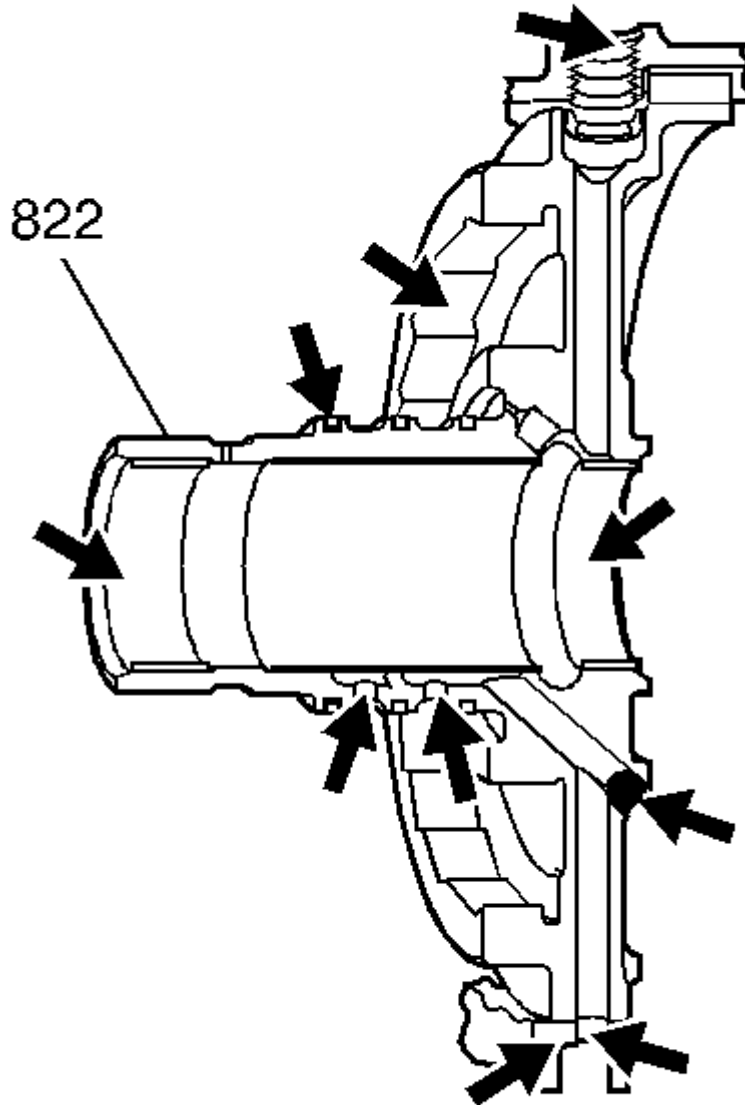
Inspection Areas On Forward And Coast Clutch Support
